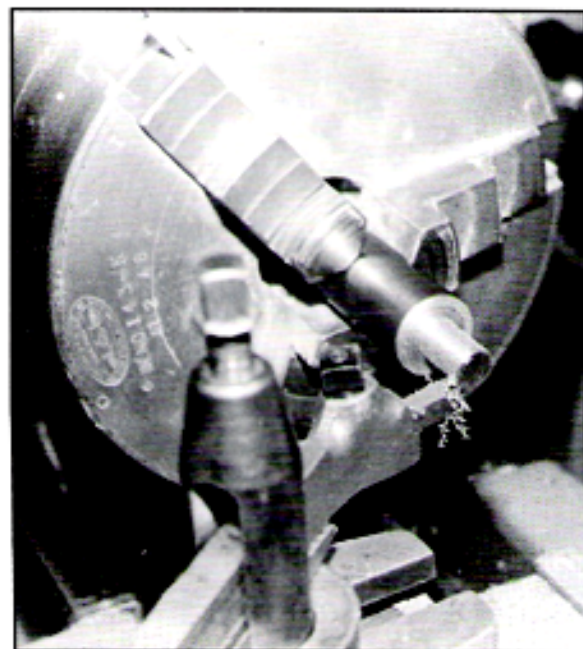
TURNING THE END OF THE PUNCH, IN THE LATHE, TO FIT THE DRILL CHUCK OF MY PRESS.
